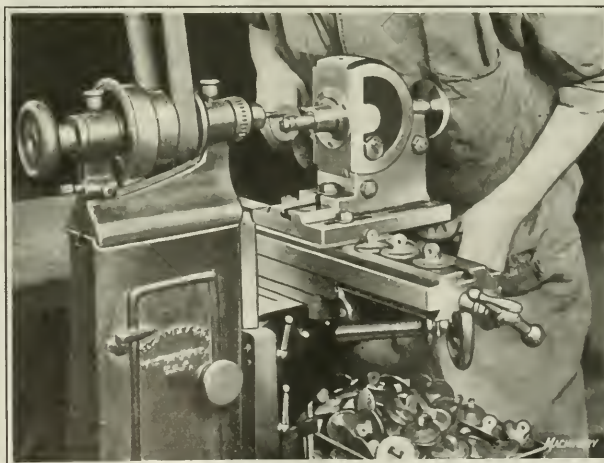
Milling the Circular Lug on Ames Gage Back on a Bench Miller
